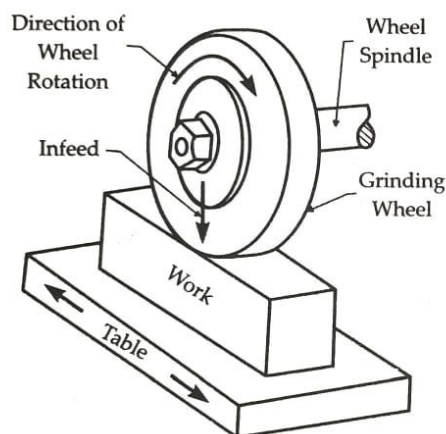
Working principle of a Horizontal Spindle Reciprocating Table Surface Grinder.
